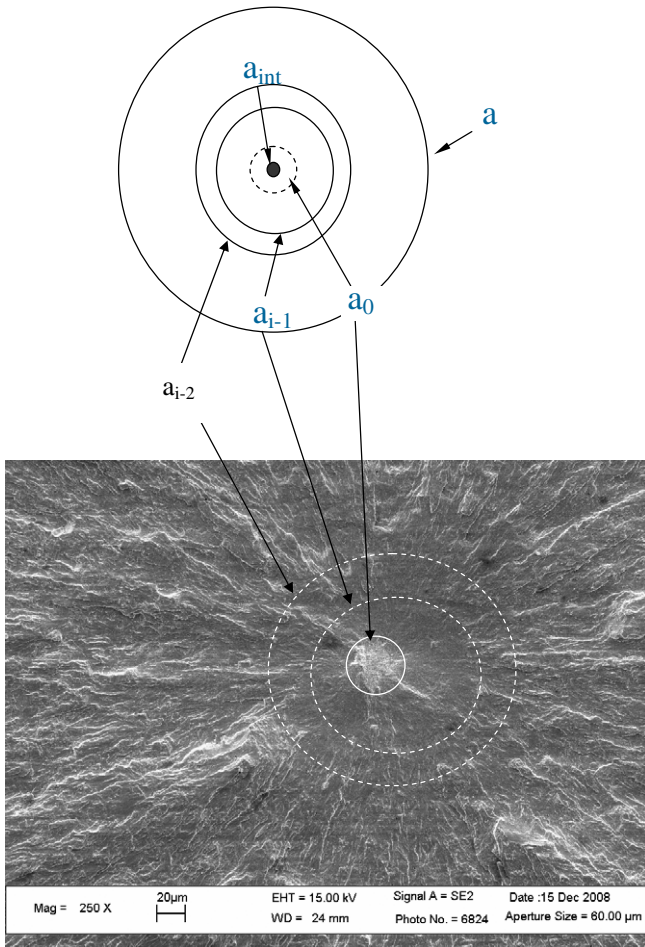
Identification of the relevant crack sizes in the mechanical model (bearing steel).
